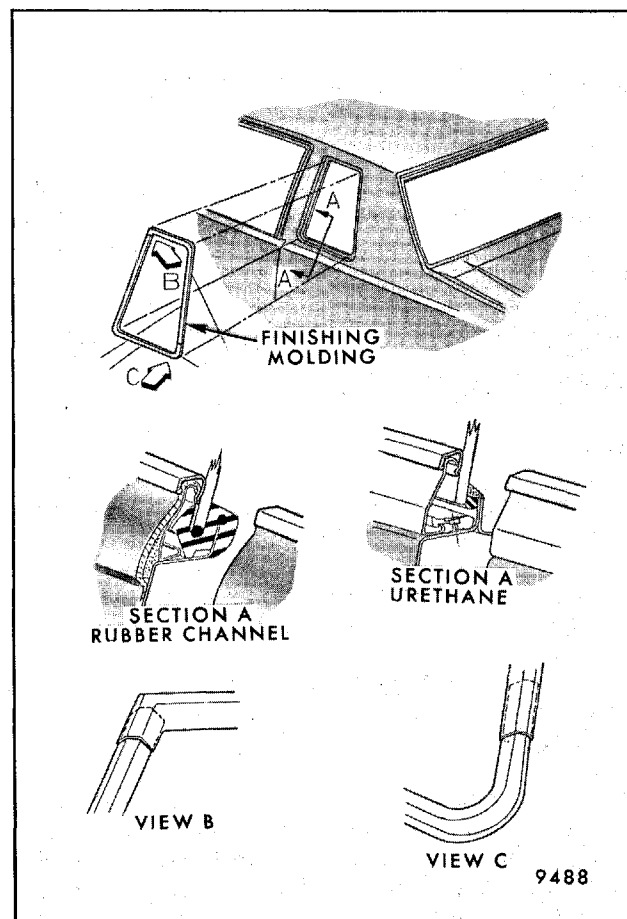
Outside Loaded Quarter Window - "C" Styles Typical
